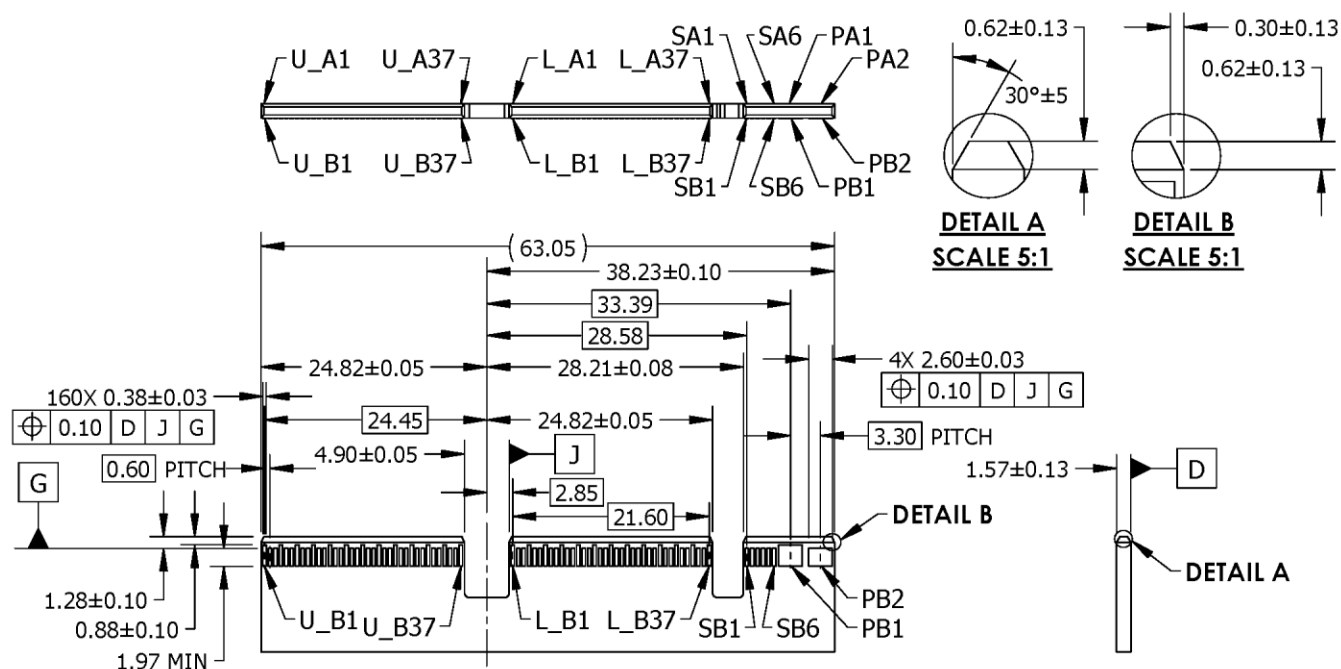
Plug Paddle Card for Combo x16+21A Power Plugs
